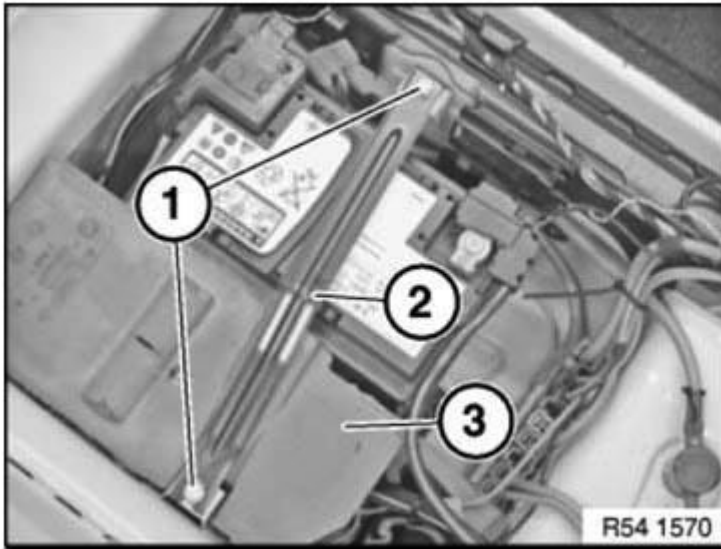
Identifying Insulating Mat And Battery Rollover Protection With Screws
